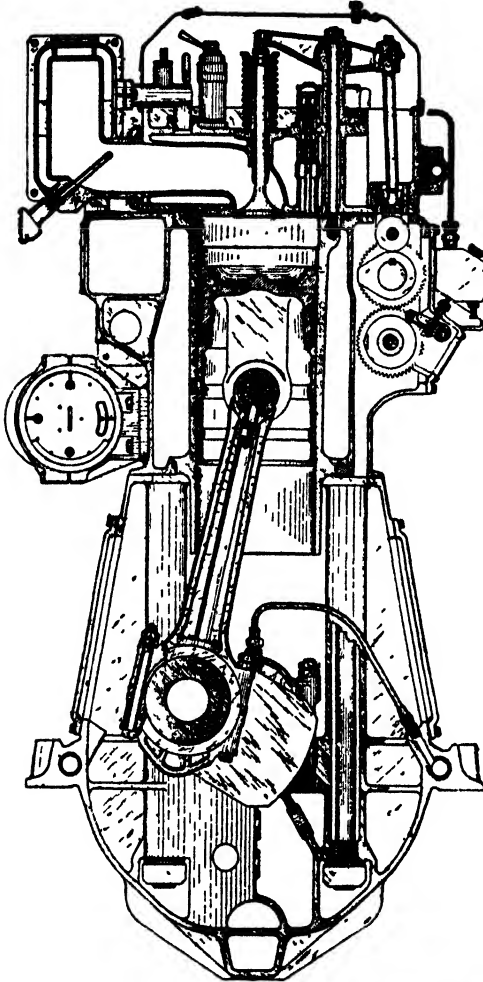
Section through a Cooper-Bessemer Diesel.
